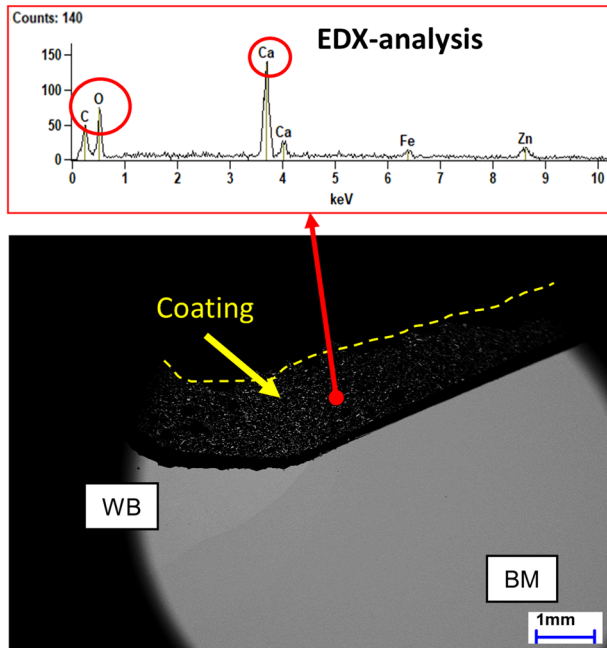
| Coated samples. Coated austenitic stainless steel weld bead (on S355JR) after 360 days of aging in the Baltic Sea. (BM base material / WB weld bead).
